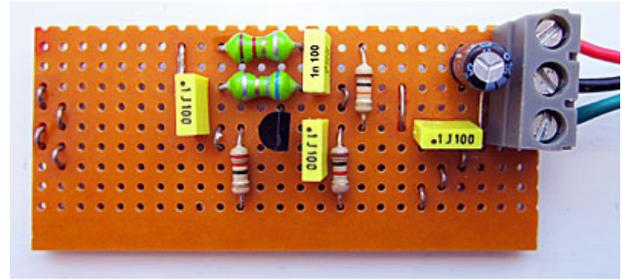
Hartley Oscillator - Stripboard Version
